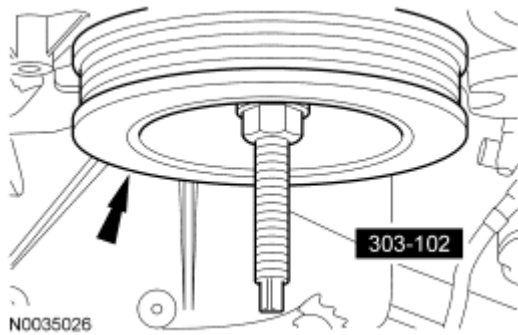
Installing Crankshaft Pulley Using Special Tool (303-102)
